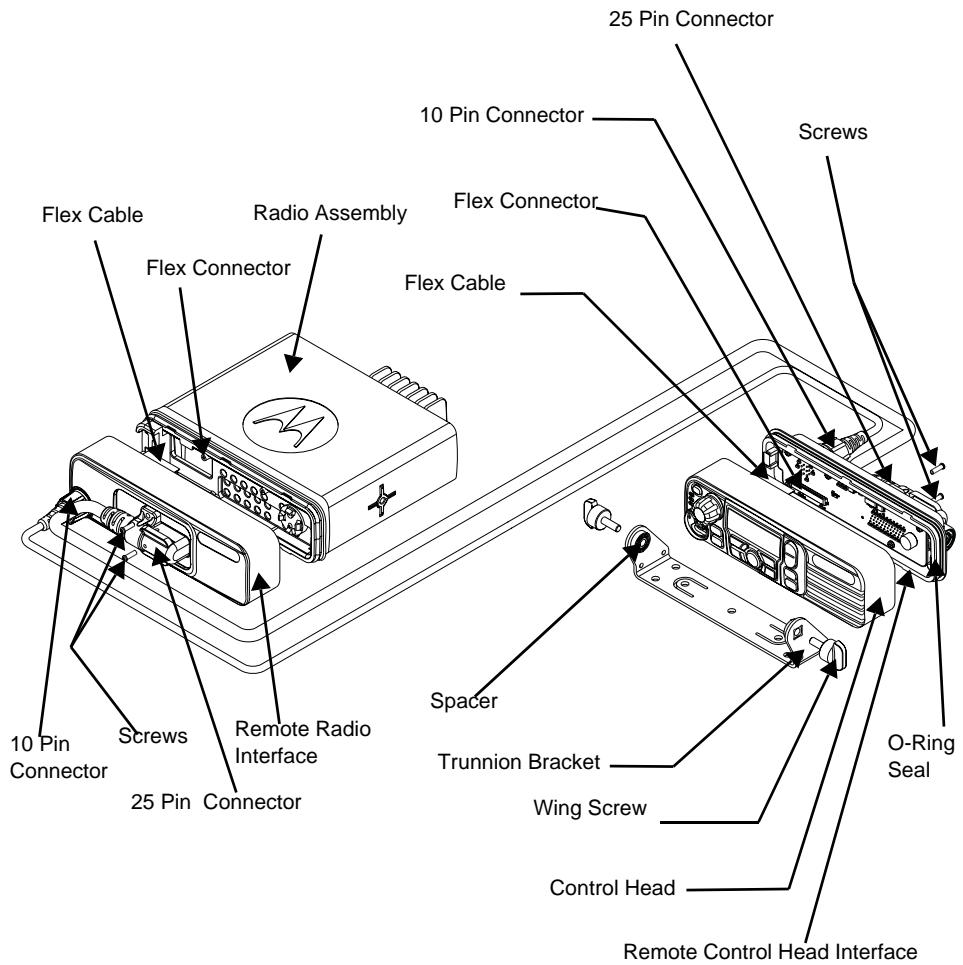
Remote Control Head Assembly and Trunnion Mounting
